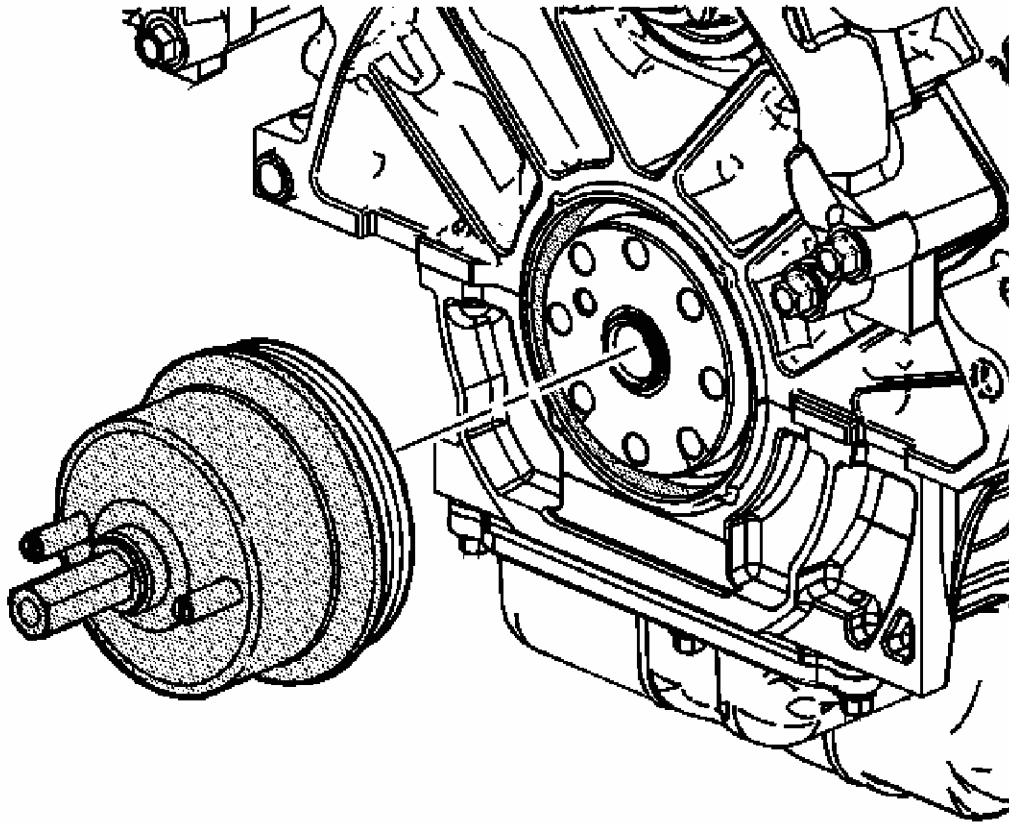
Threading J 45930-A Mounting Bolts Into Crankshaft
